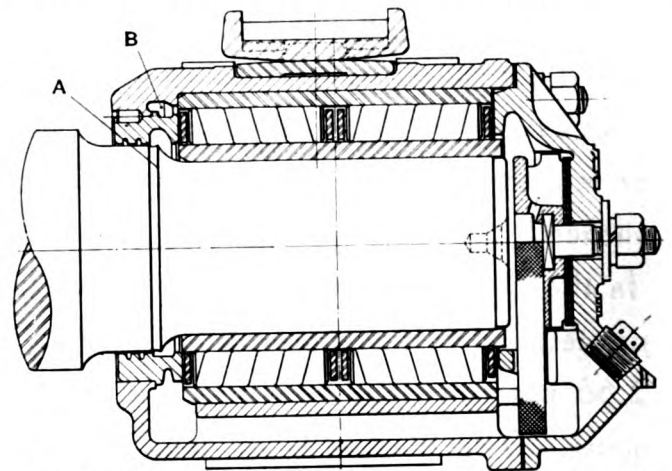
Cross-section of the Hyatt roller-bearing journal box showing the oil-seal bushing
